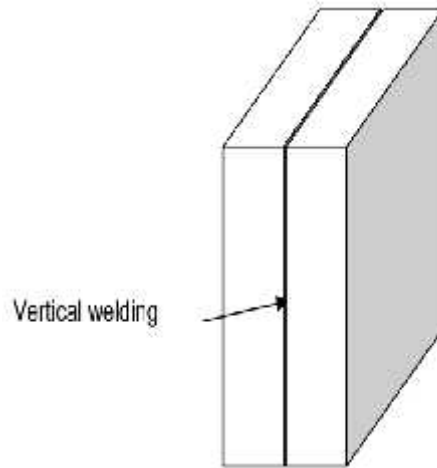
Scheme of placement of components to be welded for vertical welding
